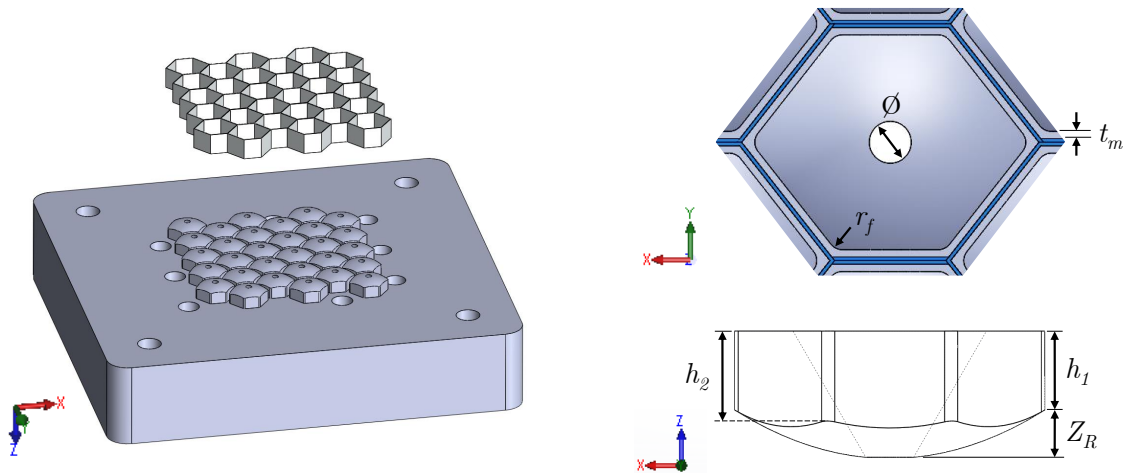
Mold design, showing close upper and frontal views of an hexagonal mold unit using the CAD software, featuring some of its dimensions: Z_R the height of the edge (or rim), the shorter and longer lengths of the hexagon h_1 and h_2 and the mechanical tolerance t_m .
